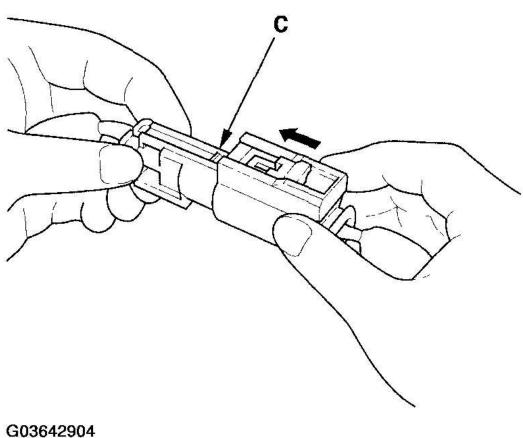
Pressing Connector Halves Firmly Of Sleeve-Side Until Connector Clicks Courtesy of AMERICAN HONDA MOTOR CO., INC.
